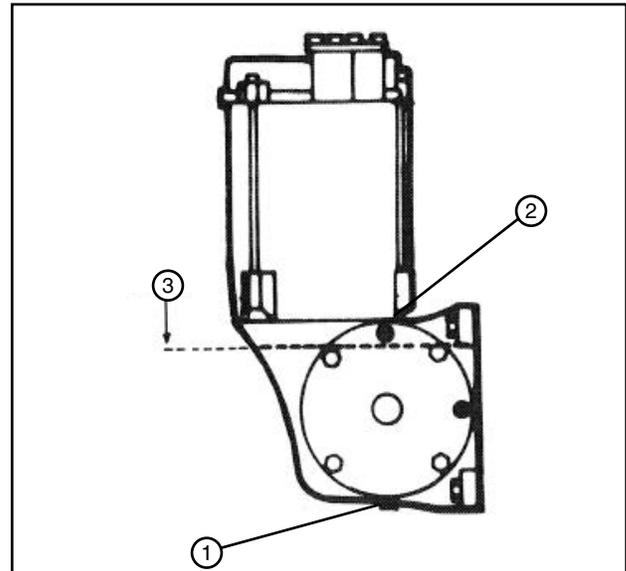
1. Drain Plug 2. Fill Plug 3. Oil Level
